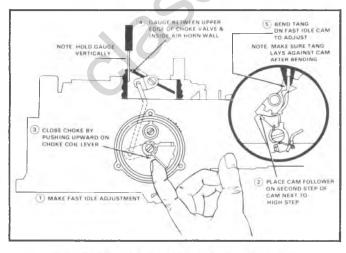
Fast Idle Cam (Choke Rod) Adjustment
